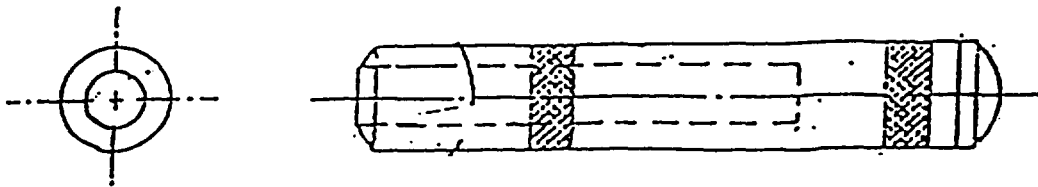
Type III, Class 4, offset tools, spark plug threads
